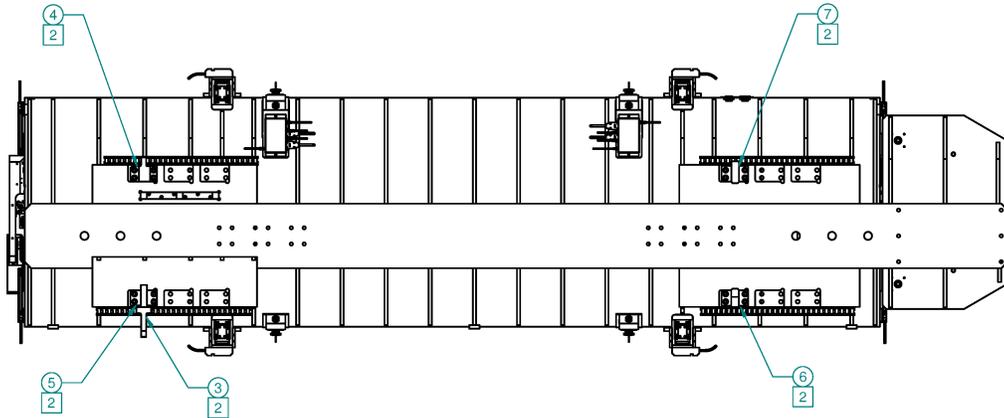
Bottom view of the HXU girder. The surfaces that go into the kinematic mount are labeled. The drawing shows the mounting surfaces in the C position.
